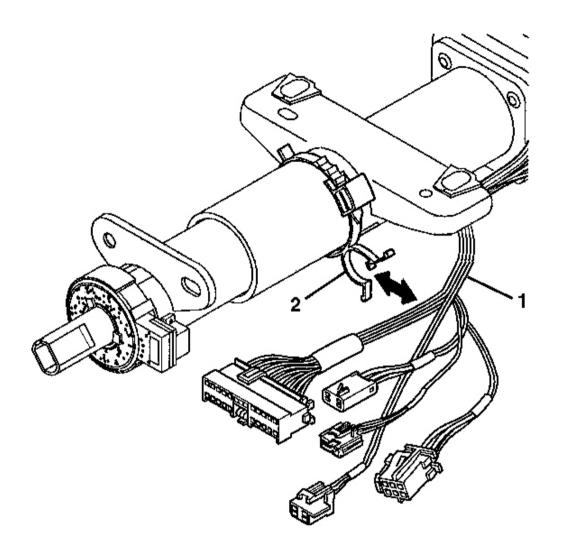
Wire Harness Assembly & Wire Harness Strap Courtesy of GENERAL MOTORS CORP.
